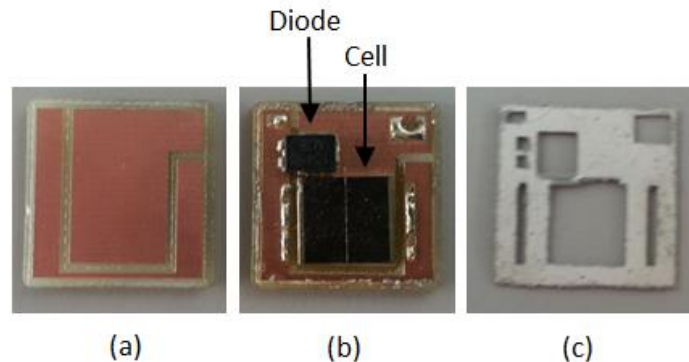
A bare PCB (a), a populated PCB (b) and the paste mask (c).
